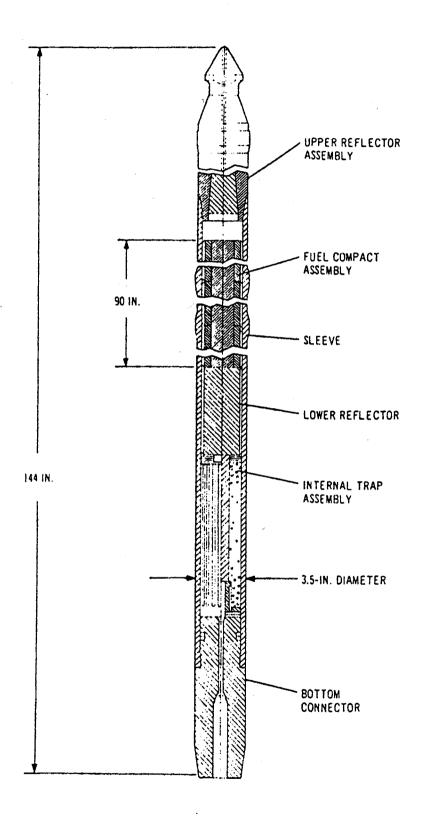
Cutaway view of a single fuel element of Peach Bottom Reactor (22)
